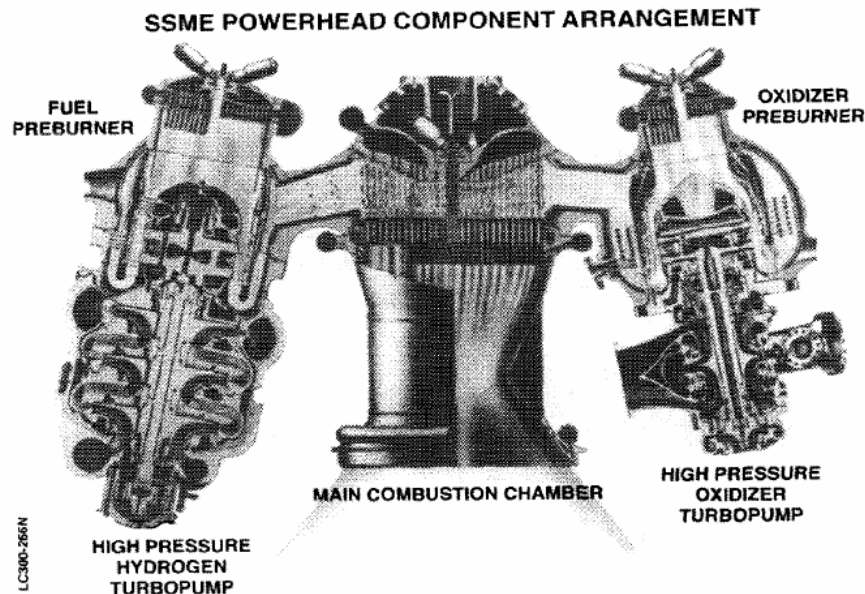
Drawing of a typical SSME engine with multi-element injector (Paster and Stohler, 1989)
